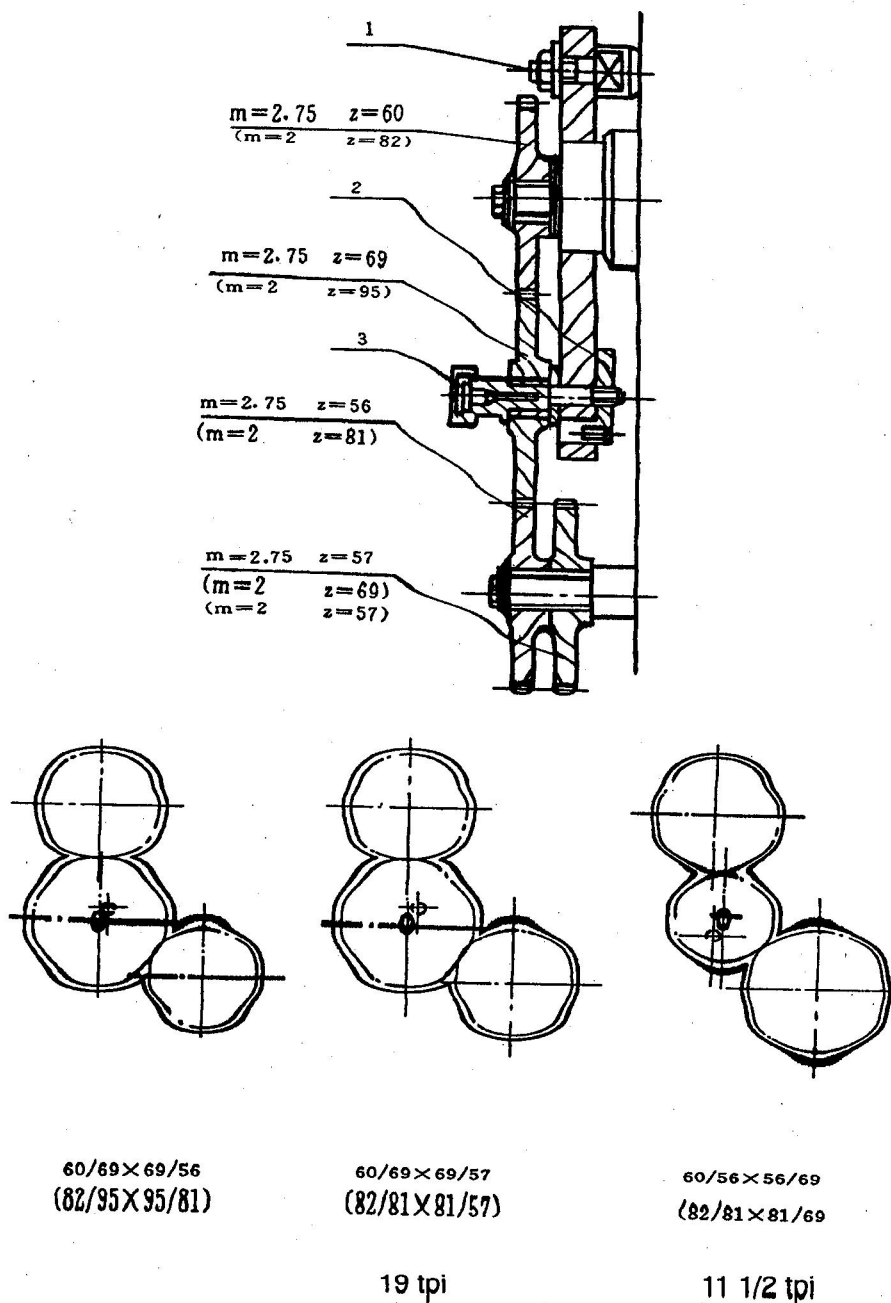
Engagement of change gears of CS6¹/₂66C
